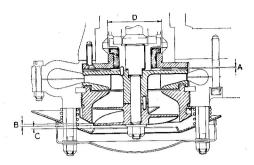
Impeller helix and vapour guide cone assembly clearances
